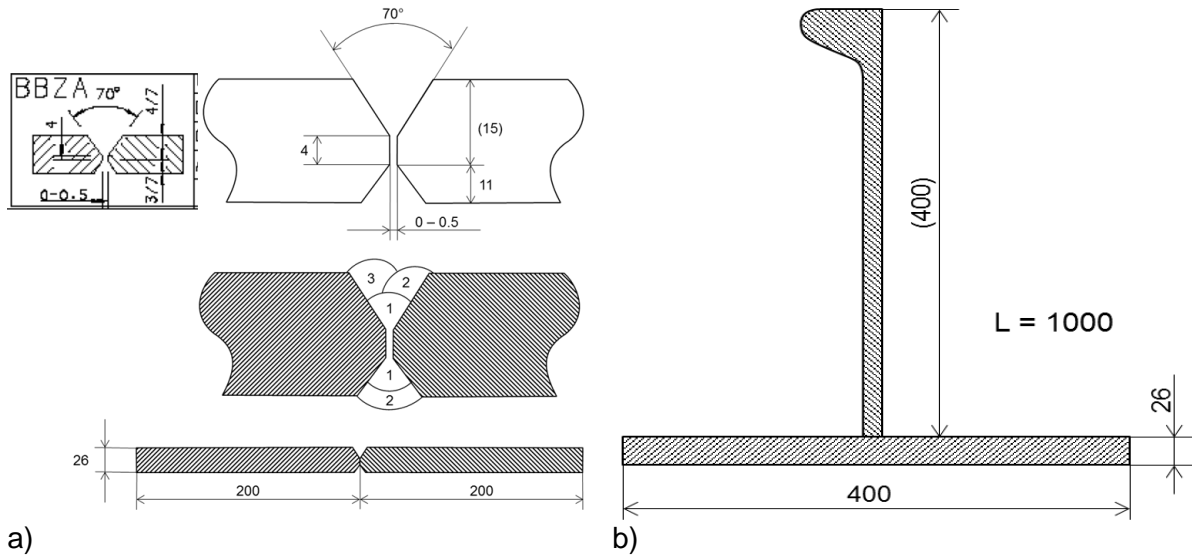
Sketches of the Technip company case welds, a) multi-pass butt weld in a non-symmetric X groove in 25 mm A420 steel and b) 14 mm thick bulb stiffener fillet welding to 25 mm hull plate using twin-SAW and manual FCAW. (Note: the 26 mm plate thickness of the sketch is not correct.)
